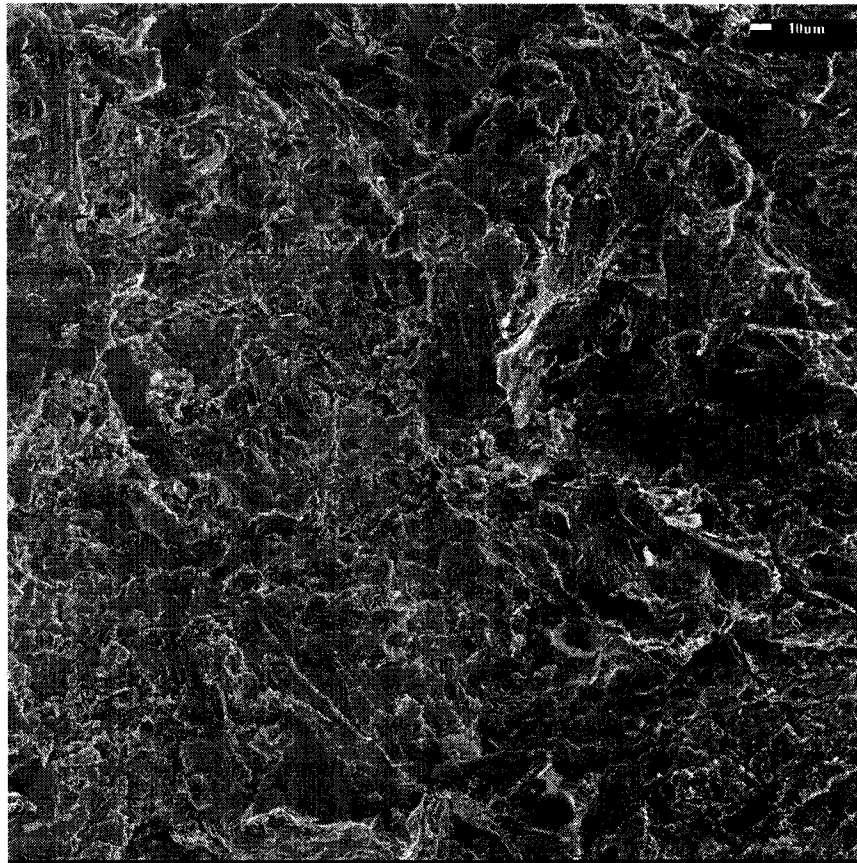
Induction-heated Crankshaft after grit blasting
